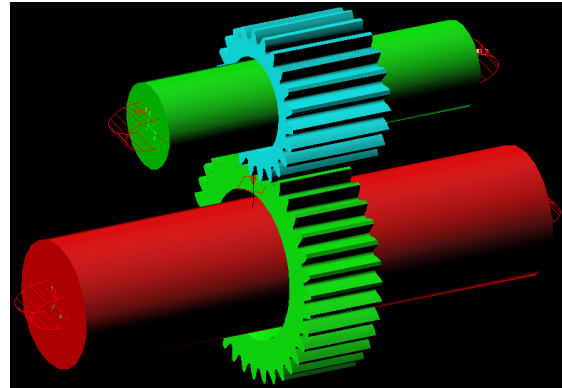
Spur gearing virtual prototype in MSC. ADAMS
